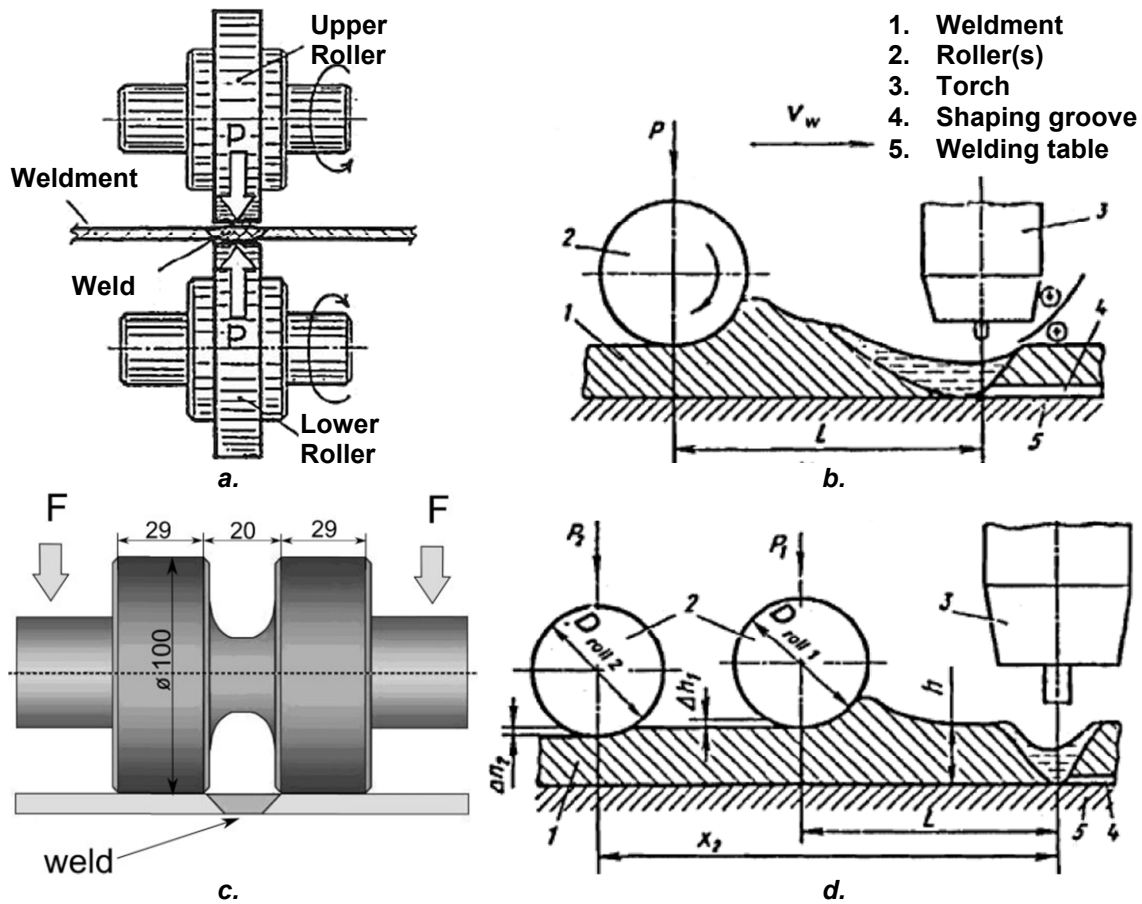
Possible rolling configurations *a.* Rolling both sides of the weld bead [94], *b.* rolling the top of the weld bead [87], *c.* rolling beside the weld bead [104], and *d.* rolling the weld bead with two tandem rollers [87].
